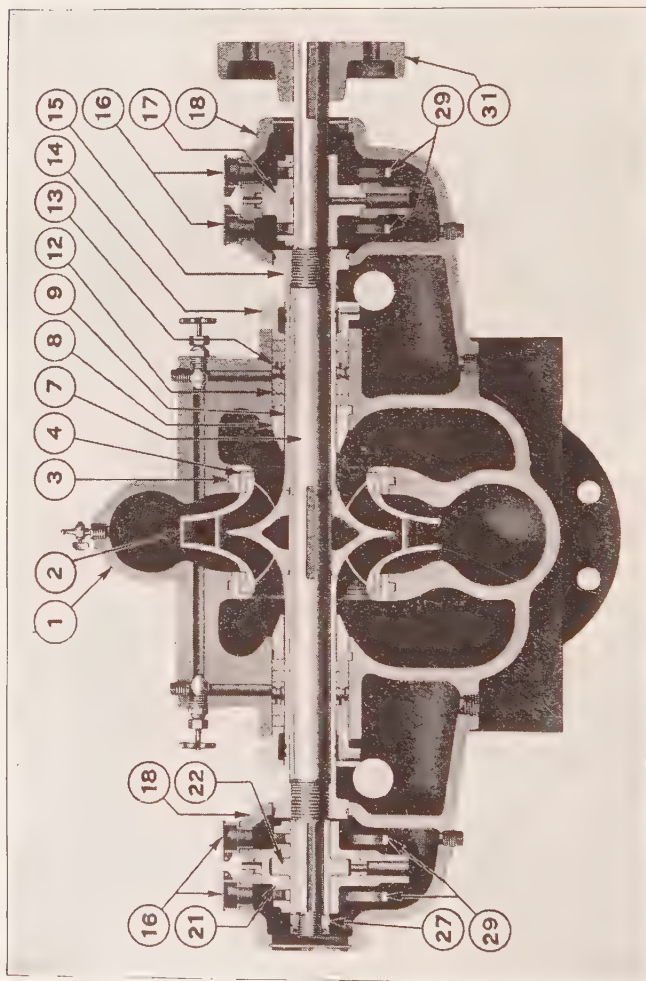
A vertical section thru a horizontal centrifugal pump showing construction details.
